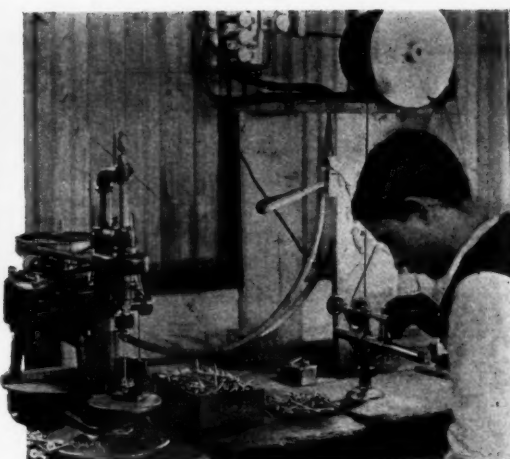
In the drilling of the spraying nozzles, great care must be taken to have them absolutely accurate and uniform. Two jewelers' lathes are used, the one on the right serving to center the nozzle, while the small drill placed on the left is used to complete the operation.
